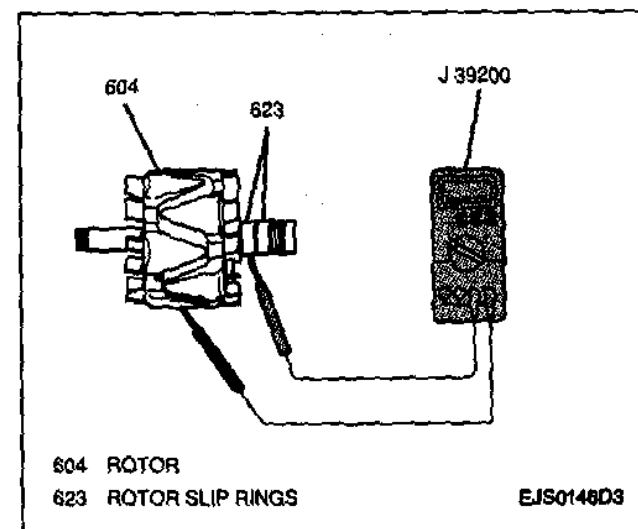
Measuring Rotor Slip Ring to Rotor Resistance
